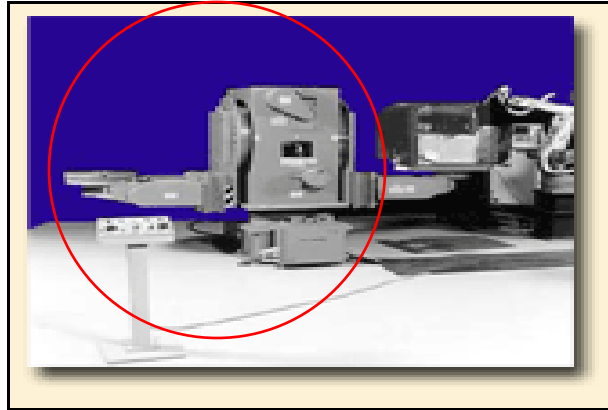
RC505001 "2003" Panasonic 3 Axis Model ISP Cartesian Robotic Tig Welding Cell
